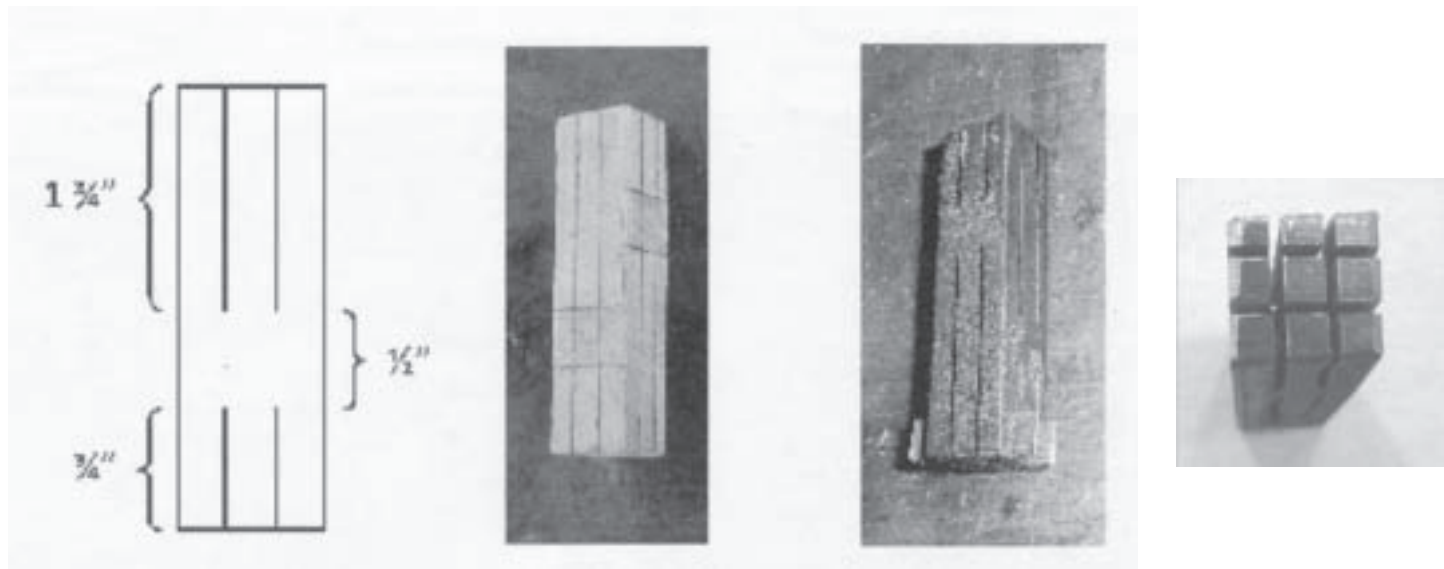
Cut layout (left). blank with marked cuts (center), cut blank with spacers (right)
